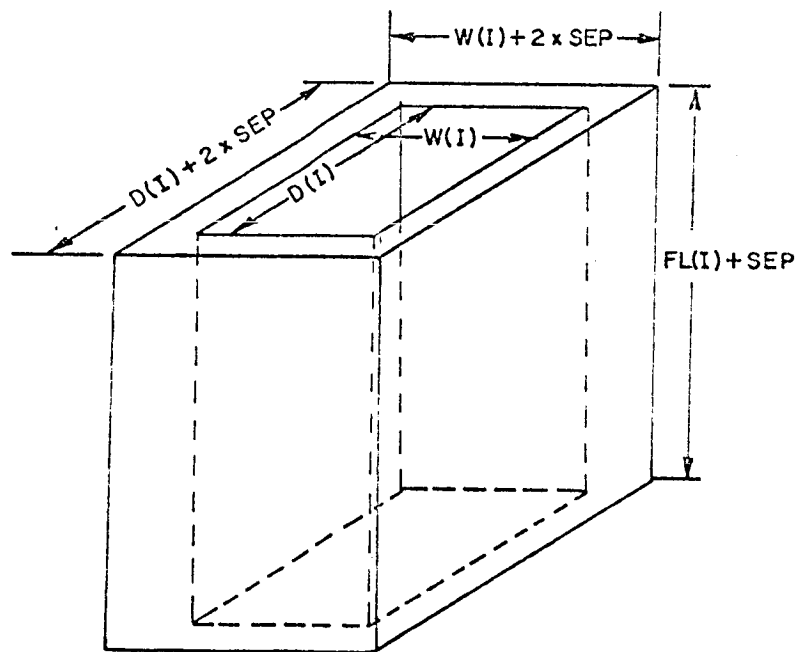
SKETCH OF RECTANGULAR COMPONENT IN BLOCK
